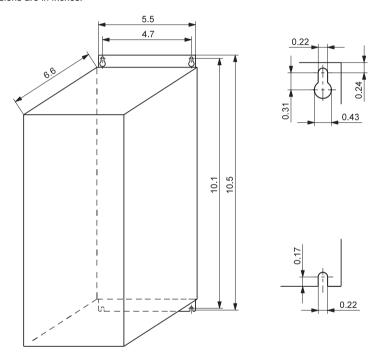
Dimensional sketch of CU 321 (without the NEMA 1 kit)
